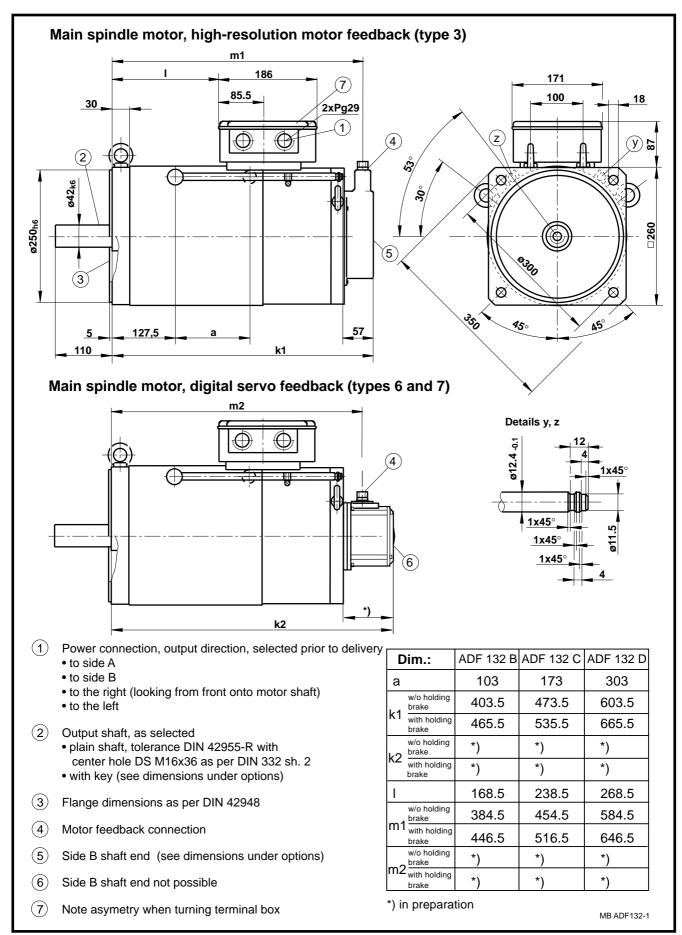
Main spindle motor ADF 132 - dimensional data
